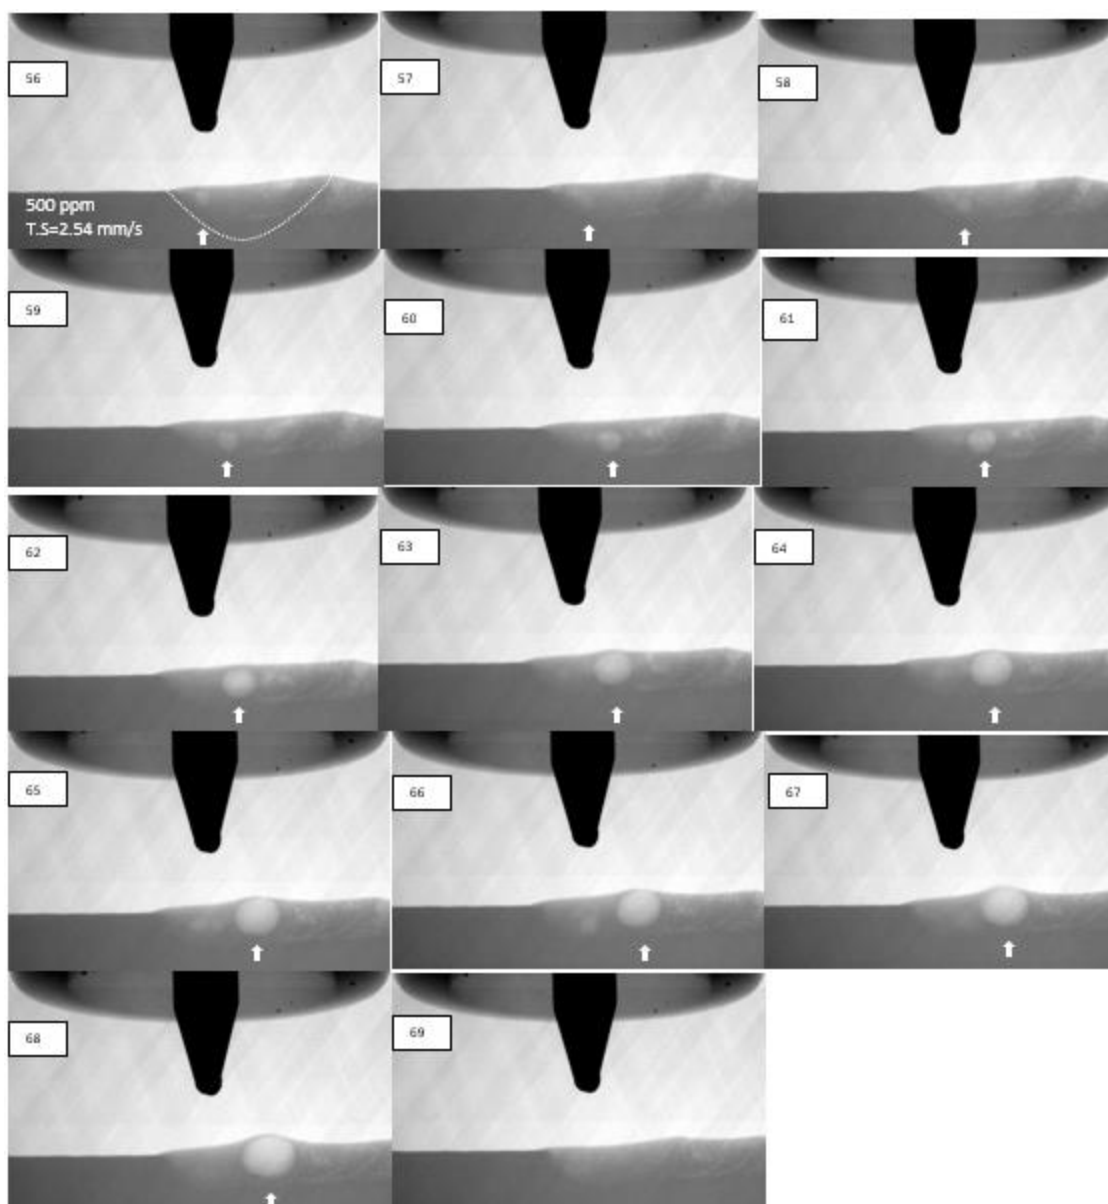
Alloy 6061 welded using 500 ppm of shielding gas hydrogen at 2.54 mm/s.
